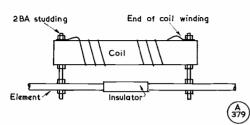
Method of fixing the loading coils — as made to the detail given in Fig. 2 — across the element insulators.
